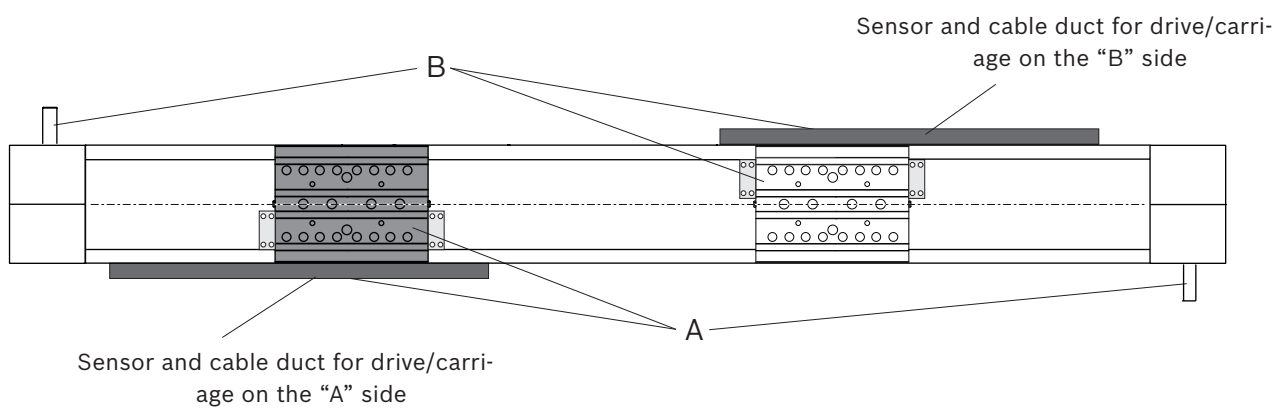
Mounting the magnetic sensor (CKK/CKR-280)
